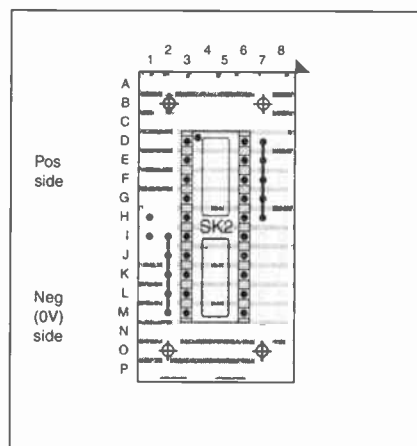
capacitor “test” socket SK2 is mounted on a piece of stripboard, which is bolted to the case lid.
